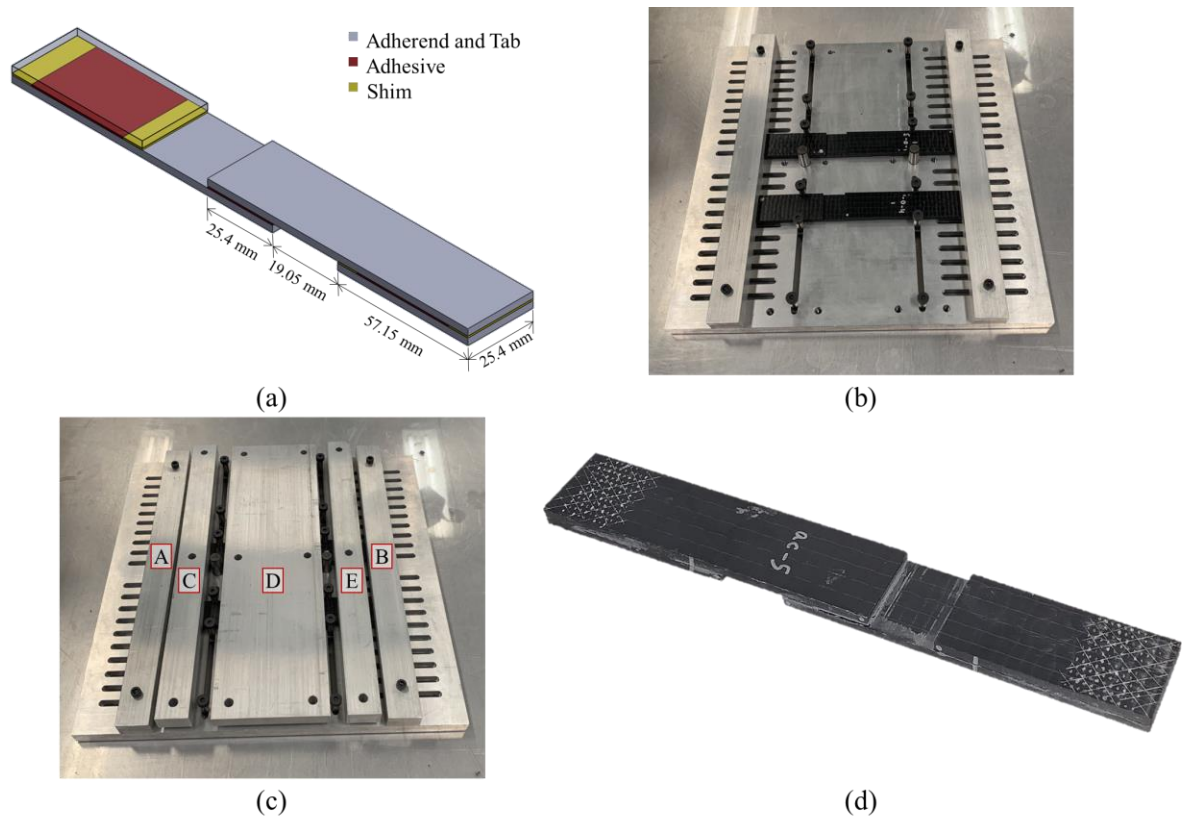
SJL specimen bonding procedure: (a) The geometrical properties of SLJ specimens, (b) Bonding fixture without top plates, (c) Bonding fixture with top plates and (d) Final SLJ specimen.
